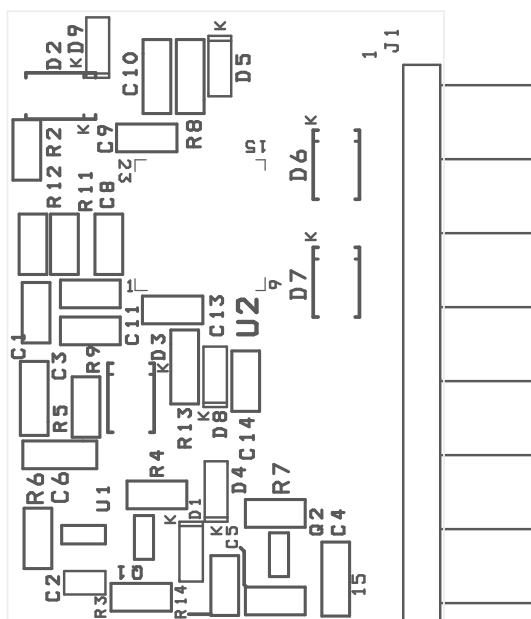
MasterGaN1 daughterboard PCB track – top side
